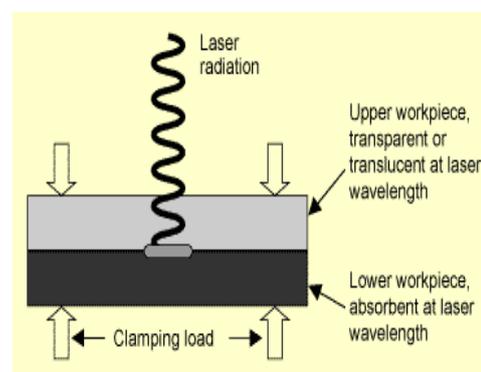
Through-transmission laser welding - cross-section through the welding process [4]
